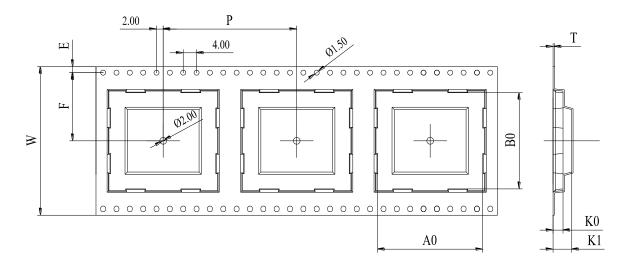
Carrier Tape Dimension Drawing (Unit: mm)
